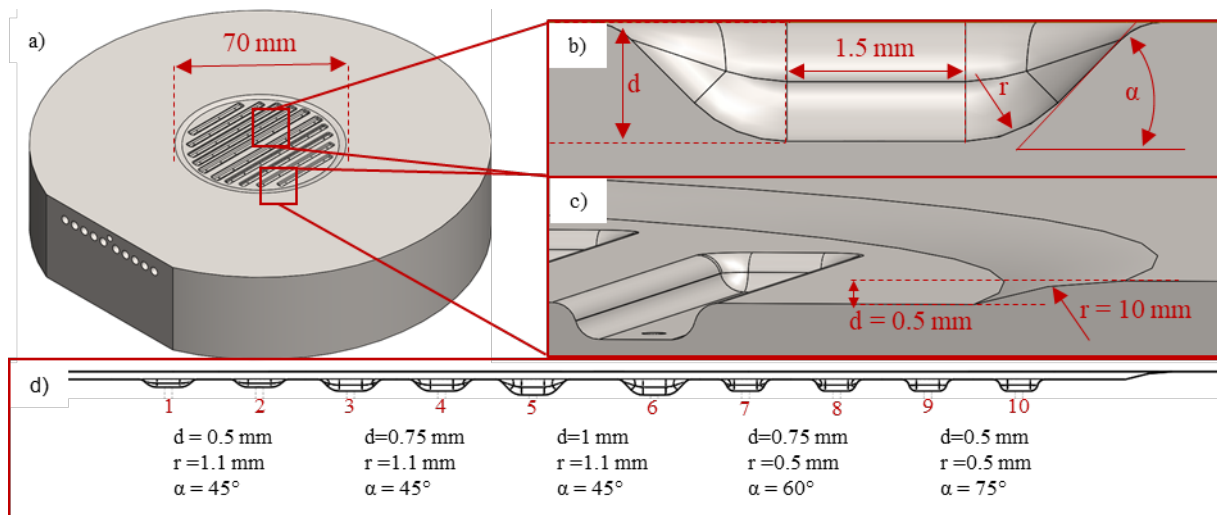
a) Die with micro channels b) sectional view of one die contour with geometrical values defining the micro channel c) sectional view of die and dimensions d) sectional view of all micro channels and geometrical dimensions.
